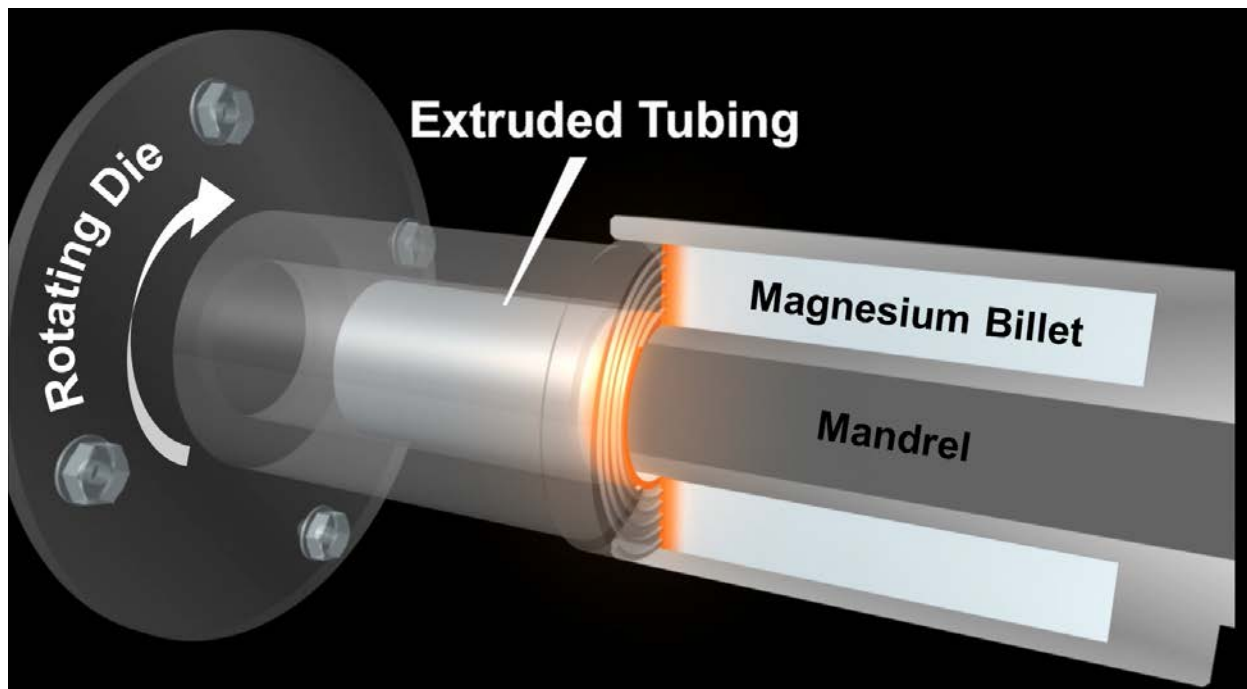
A.2.1. Cross-section of tooling showing a direct extrusion embodiment of the ShAPE™ process. Source: PNNL.
